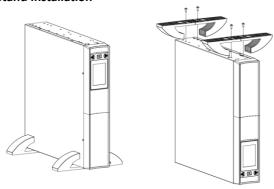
The installation diagram of UPS rack stand. Screws are provided to fix the position of the rack stand.
